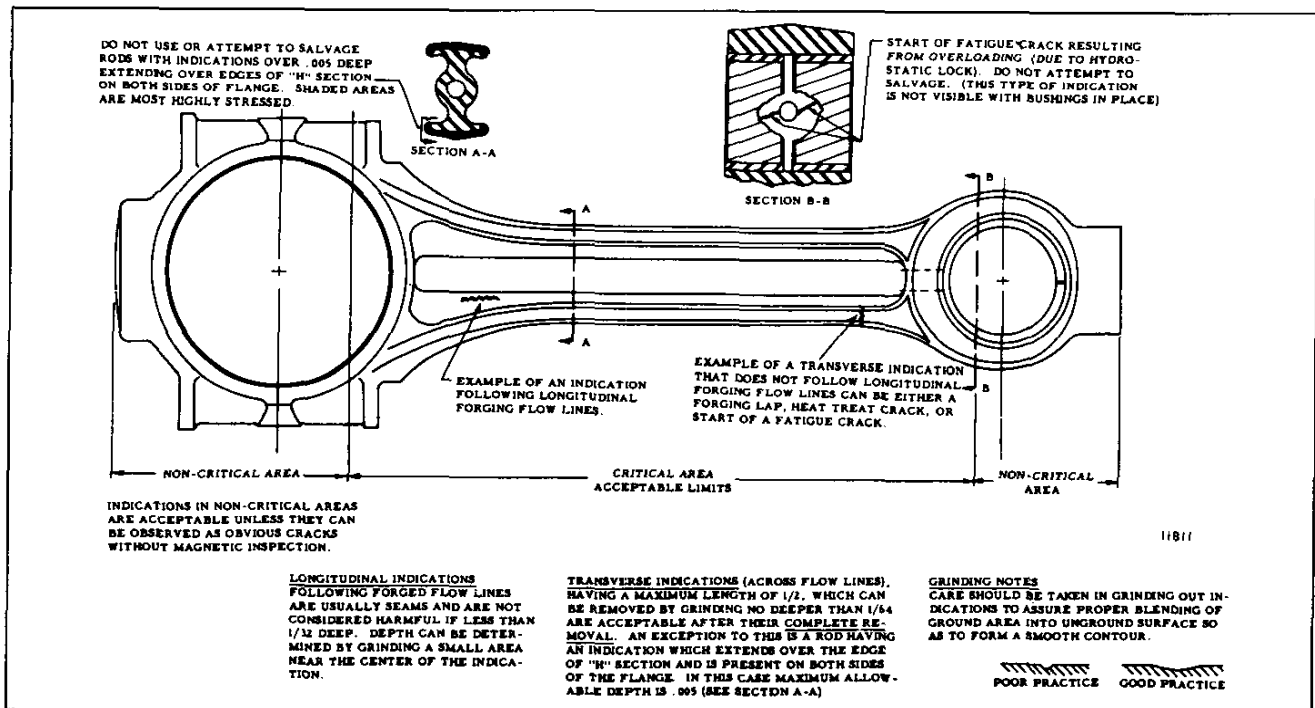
Magnetic Particle Inspection Limits for Connecting Rod
